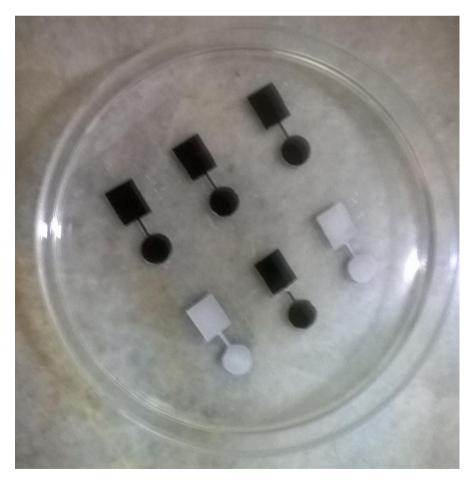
Fabrication of PDMS structure using paper mould and petri dish.
